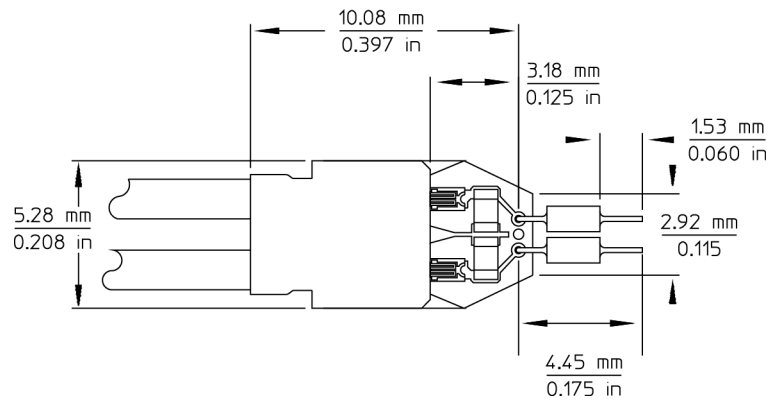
E2677B Solder-in Differential Probe Head Dimensions
